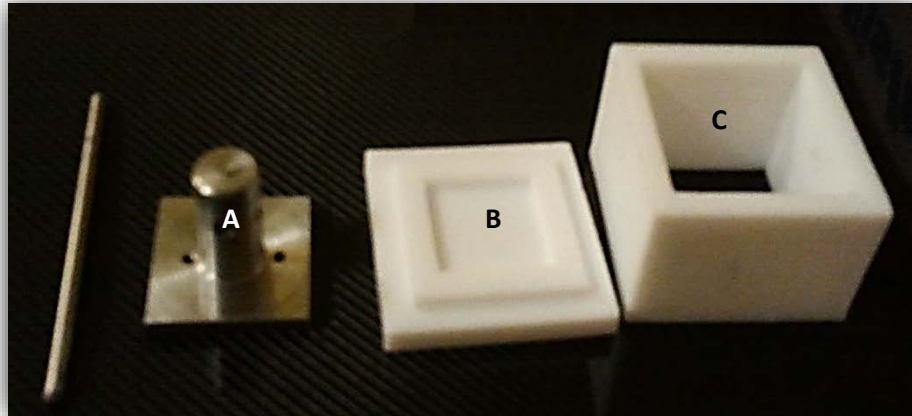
the main parts of the stamp casting assembly set; a) stainless steel stamp holder, b) Teflon master holder and c) Teflon stamp carrier holder.
